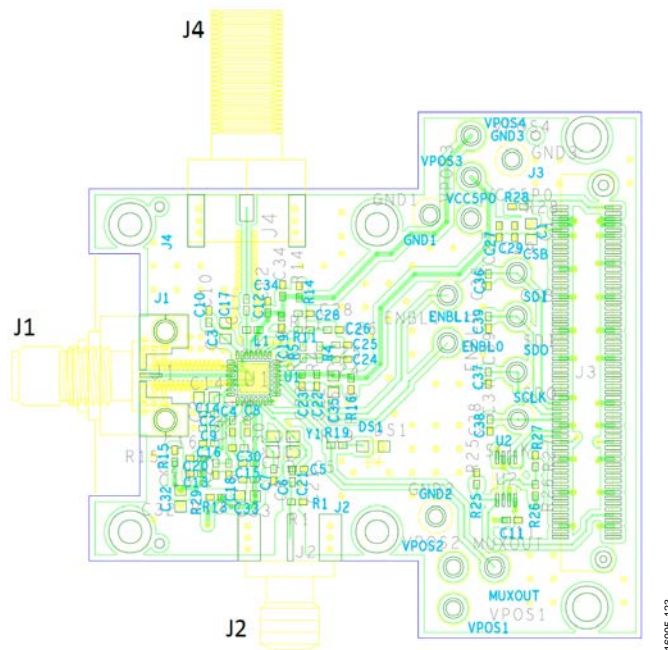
[ADMV4420-EVALZ](#) Evaluation Board Layout, Top View (Layer 1)
